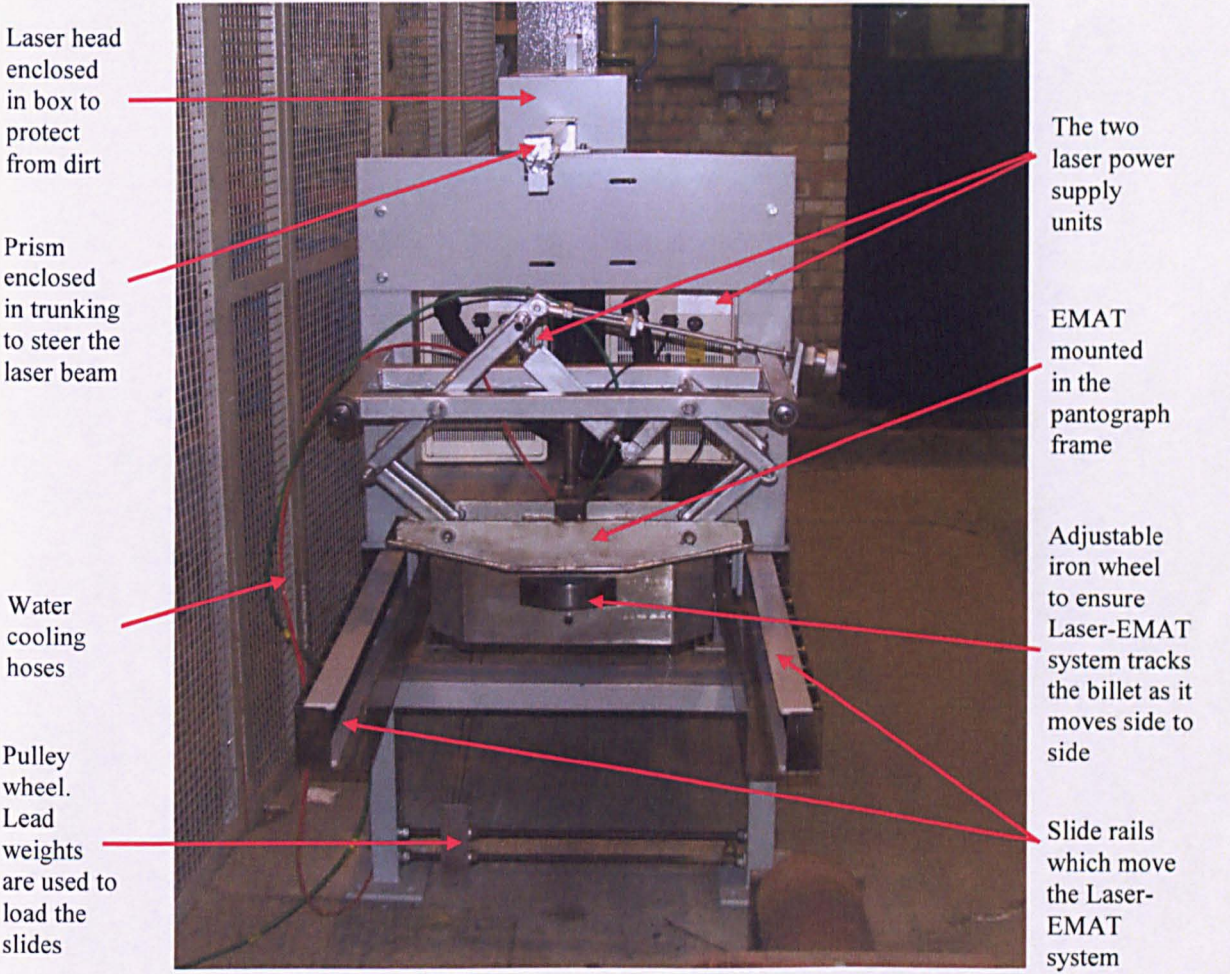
Front view of the slider system with the laser mounted on top and EMAT held in pantograph (the protective covers, shown in Fig. 33 have been removed).
